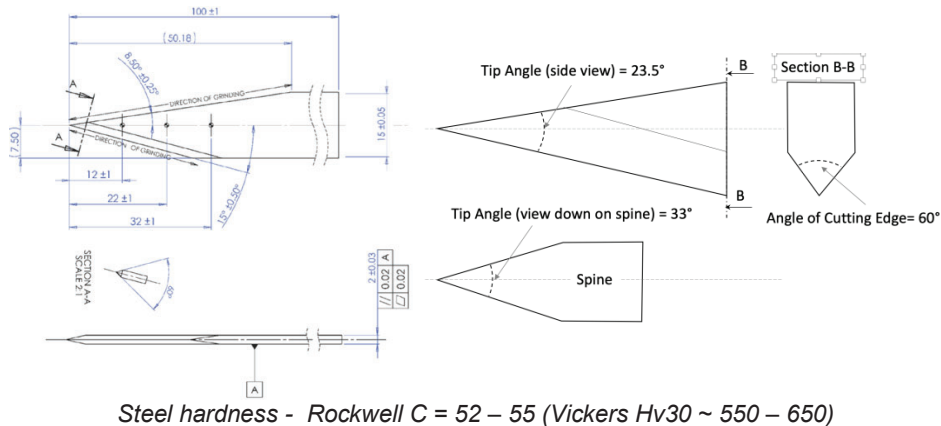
Extract from the engineering drawing of the UK Home Office P1B engineered blade and schematic close-up showing clearer view of tip angles
